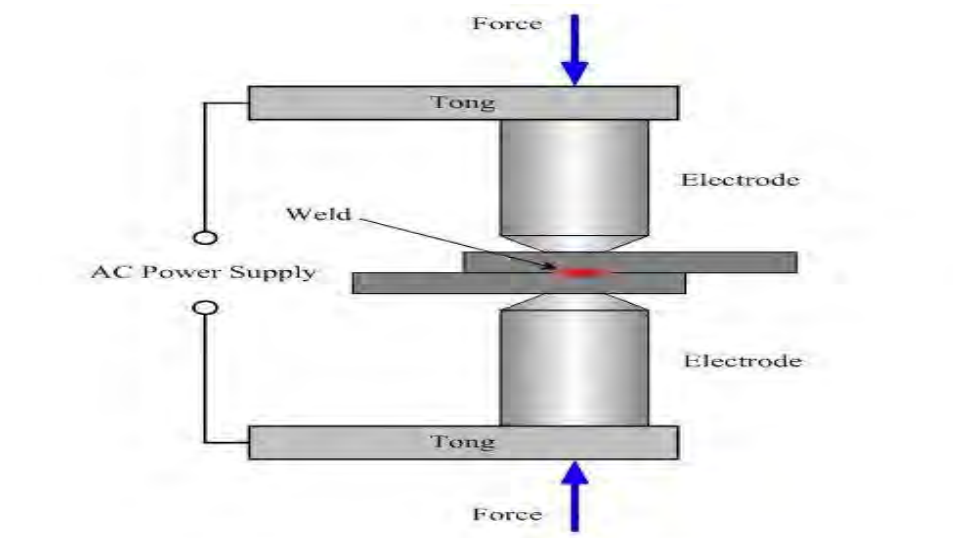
Schematic Diagram of Projection Welding
